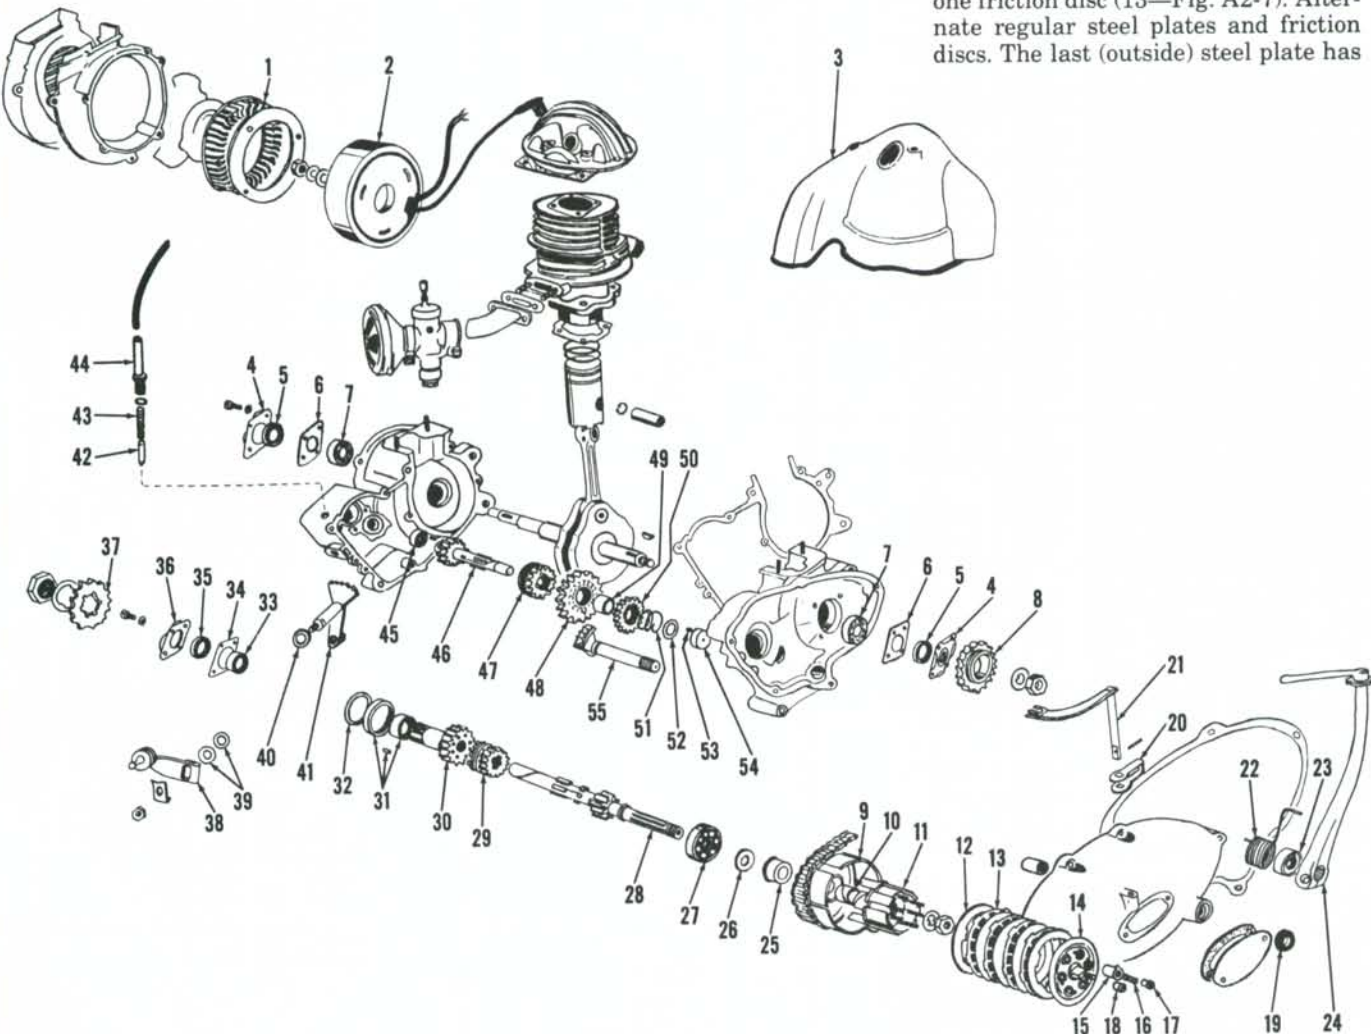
Exploded view of engine assembly. Spark plug is located toward rear.
